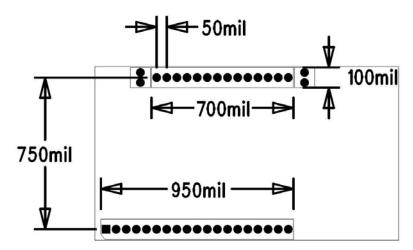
Board-to-Board Connector Dimensions for the EM35x Module
